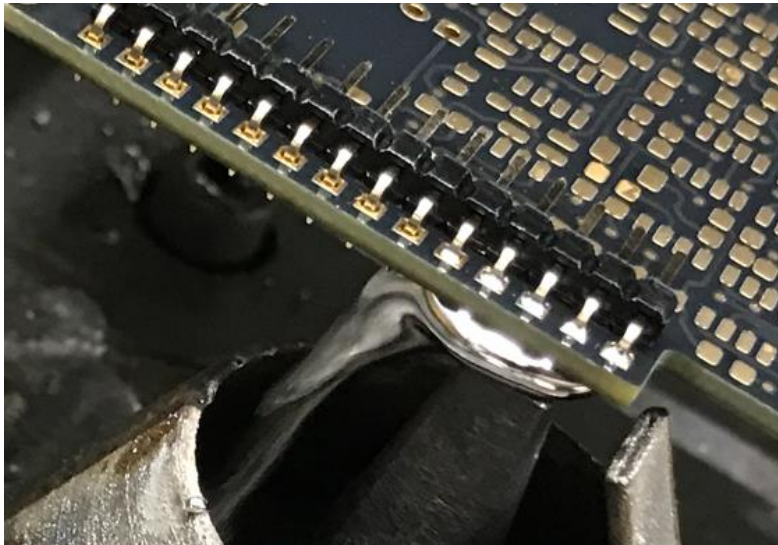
Showing test board 1 soldered with 4mm non-wettable nozzle.
